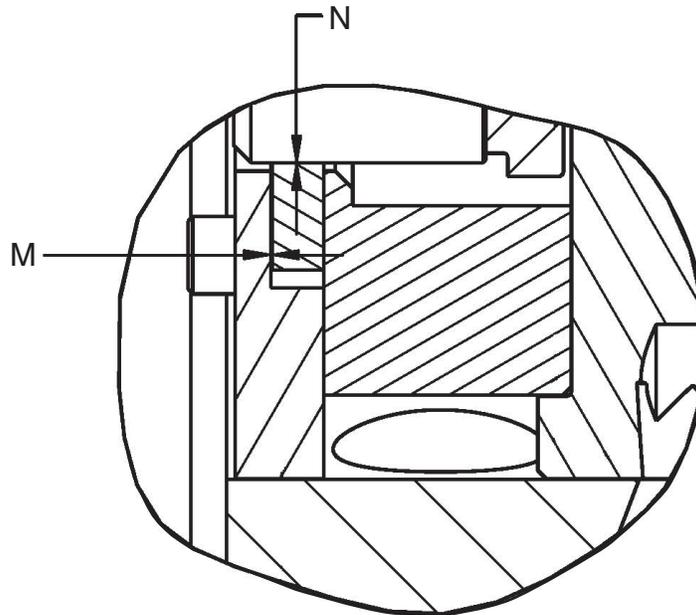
Compressor Fits and Clearances — Single-Stage Compressors (cont)
